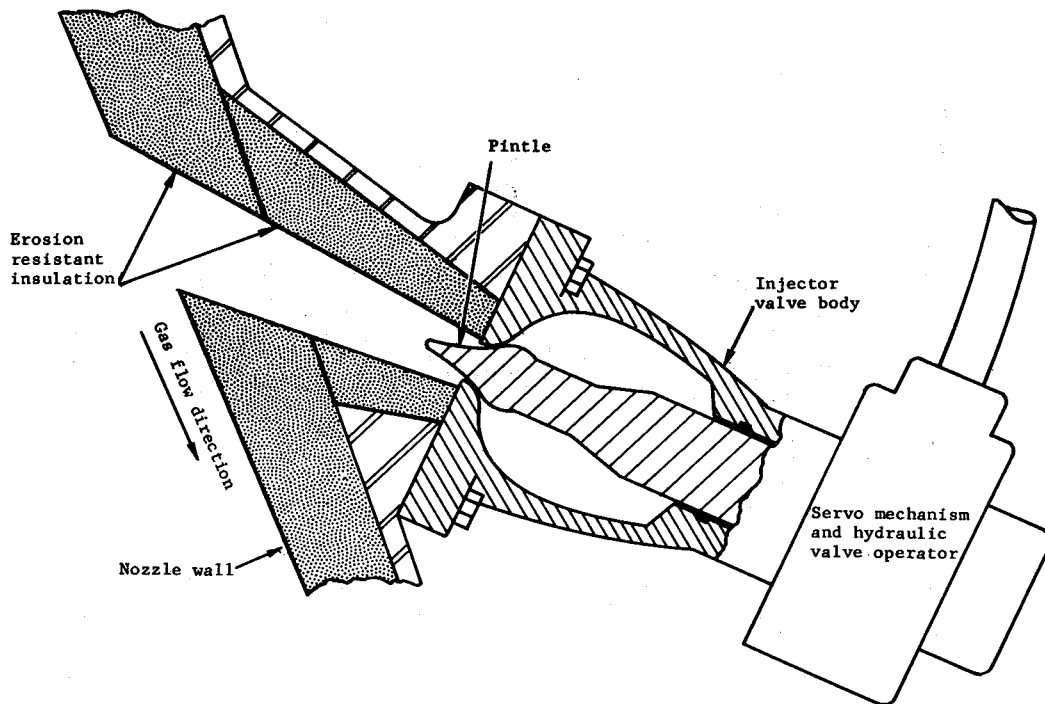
Cross section drawing of typical single-orifice injector mounted on nozzle wall.
